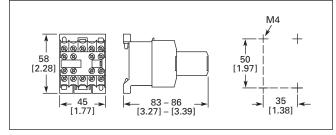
XTRM Mini Control Relay with XTMCXFA Auxiliary Contact — Approximate Dimensions in mm [in.]
